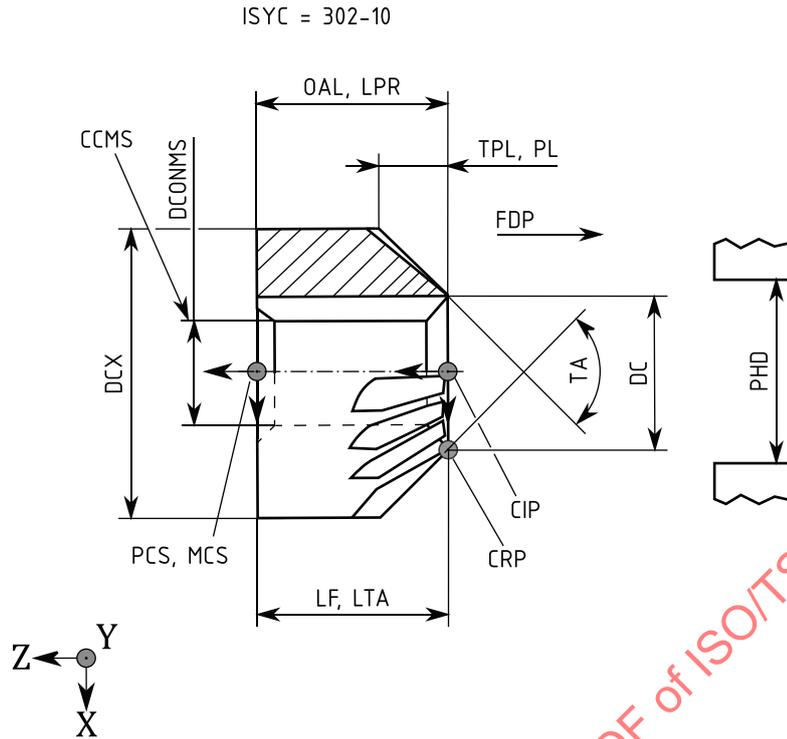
ISYC 302-10 - Tapered countersinking tool, top, solid
